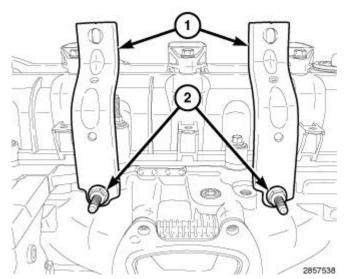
Upper Intake Manifold & Bolts Courtesy of CHRYSLER GROUP, LLC
